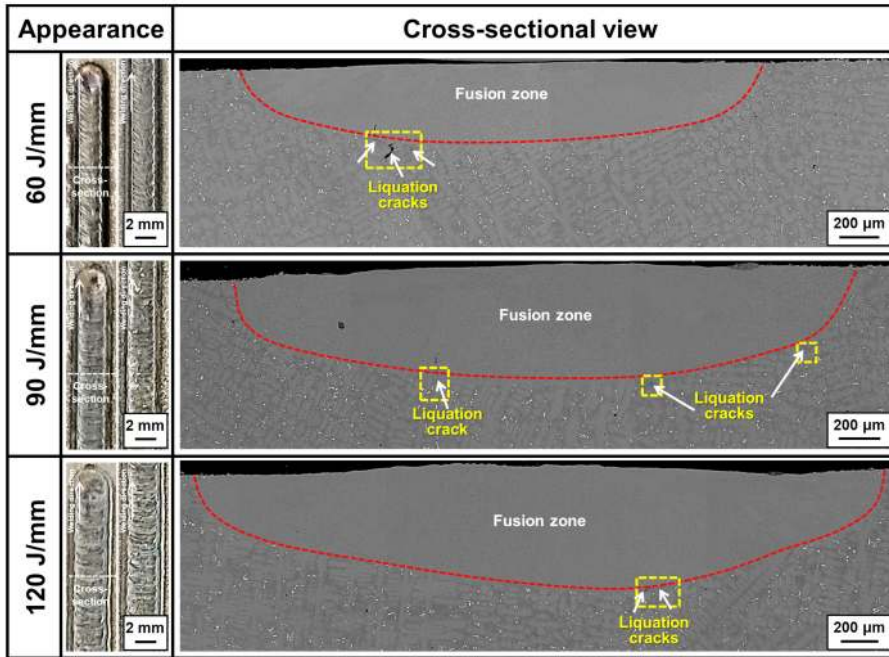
Surface appearance and cross-sectional macrostructure of the bead-on-plate welds, obtained via LBW with different heat input (60, 90, 120 J/mm), for the as-cast CM247LC specimen.
